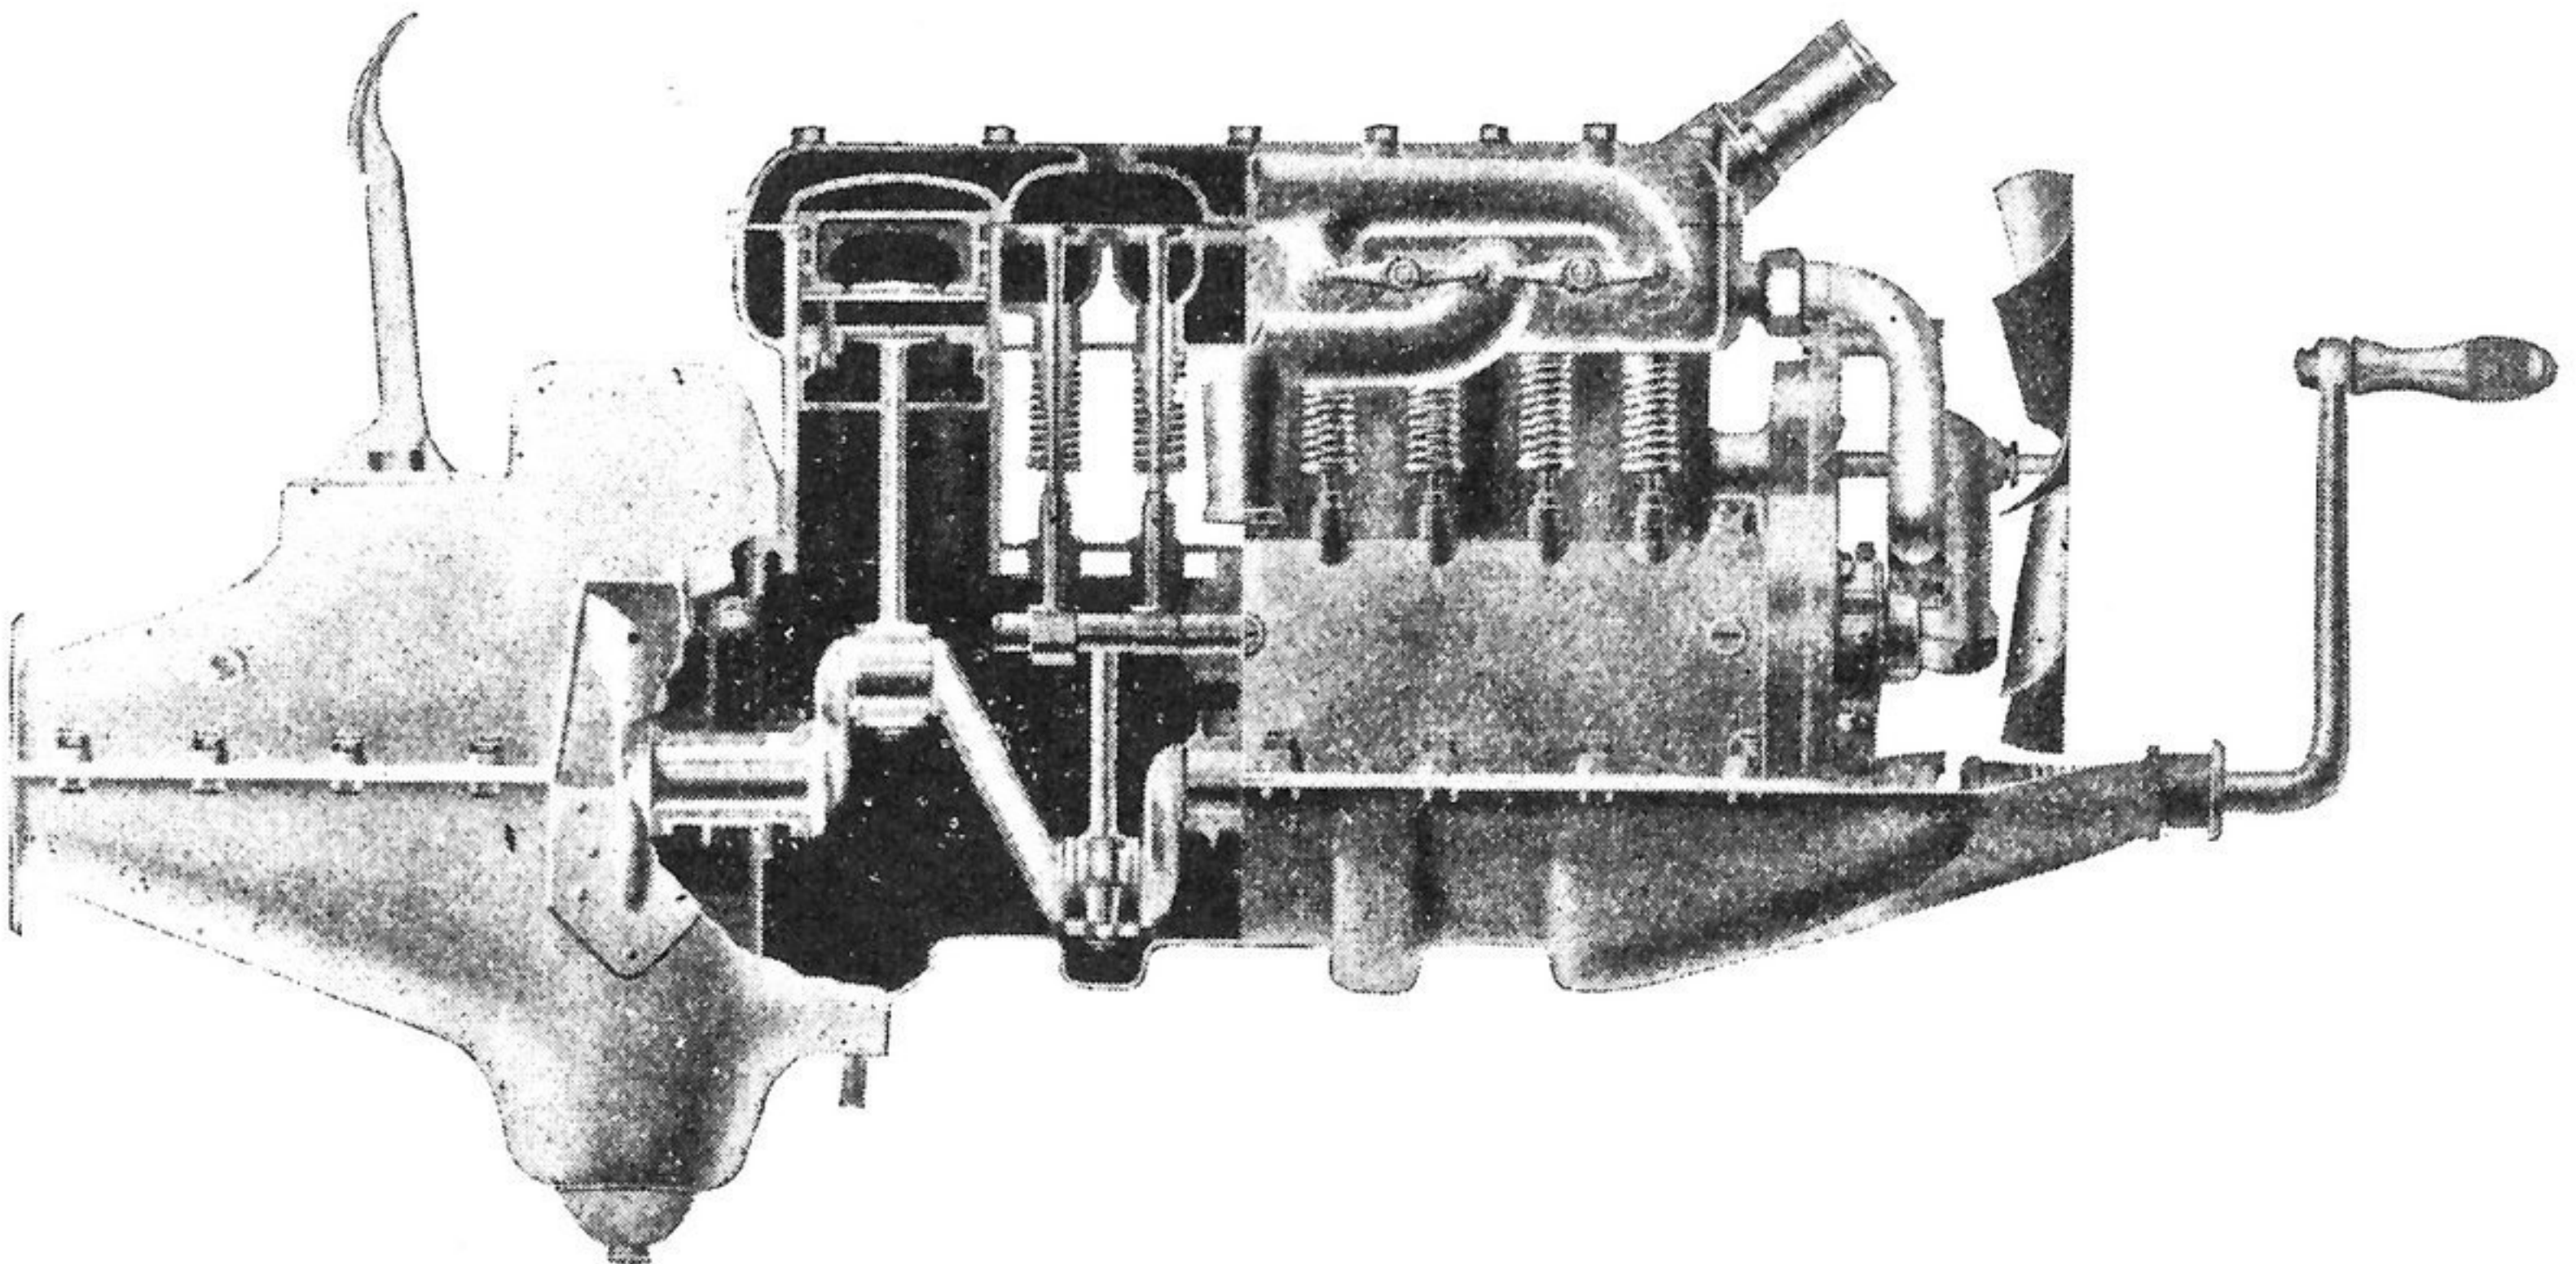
The Ford Model T 4-cylinder engine. This motor consists of three parts, an oil pan of pressed steel extended at the rear to form the flywheel and transmission housing, a center section consisting of the upper half of the crank case and all four cylinders cast in one piece, even including the two-to-one gear housing and the upper piece which forms the head of all four cylinders and is retained in position by twelve nuts. This power unit is supported at three points. There are many peculiarities of construction, as described in the text.
